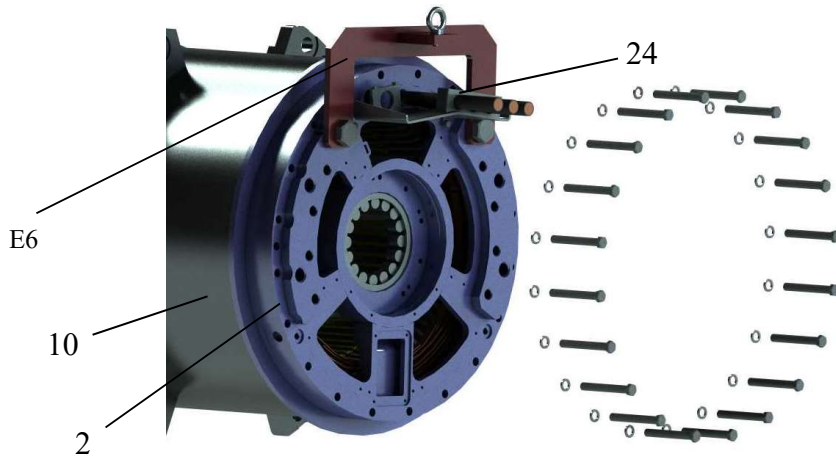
Dismantling of Bearing Shield (Brake Side)
